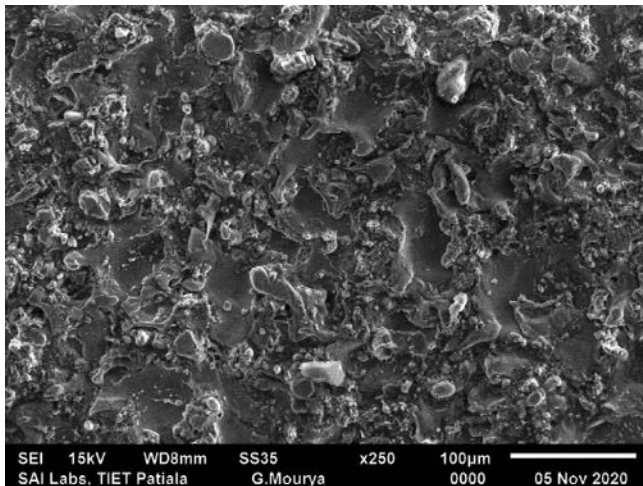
SEM Image of machined surface as per best setting for maximum MRR
